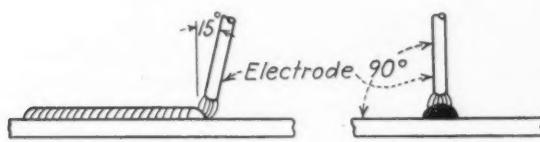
Recommended practice for welding with flux coated electrodes.
